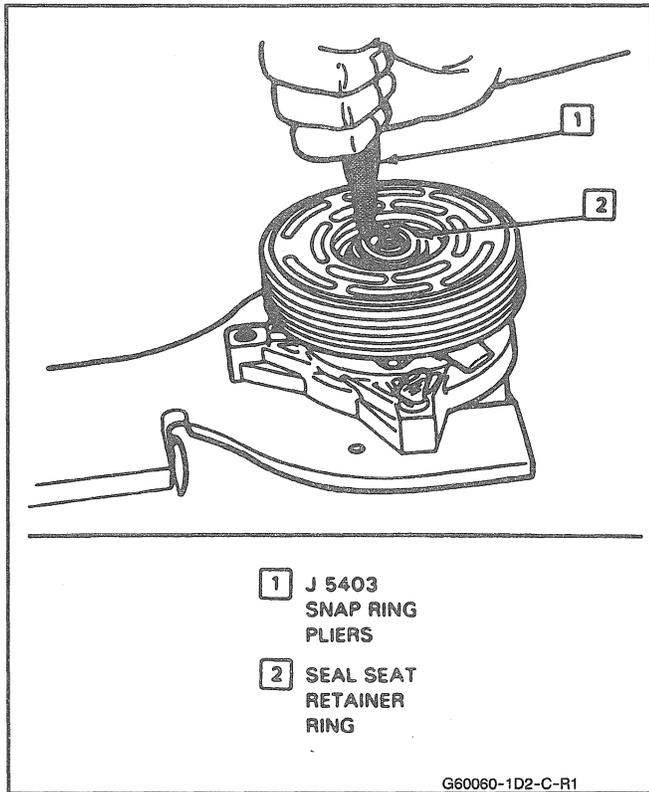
Removing or Installing Shaft Seal Retaining Ring
